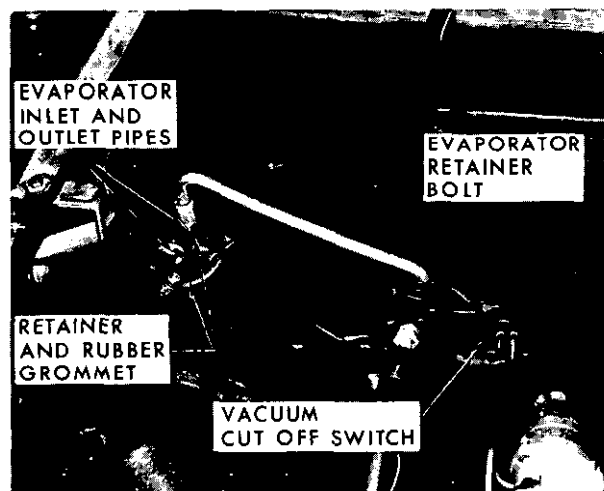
B-63 Location of Refrigerant Hoses, Pipes, Vacuum Cut Off Switch and Evaporator Attaching Bolt (Left Side) • Opel 1900 • Manta
